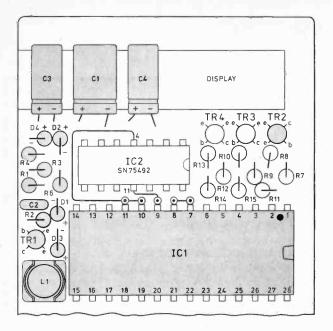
Component layout of the Sinclair calculator. The shaded components should be removed (see text)
